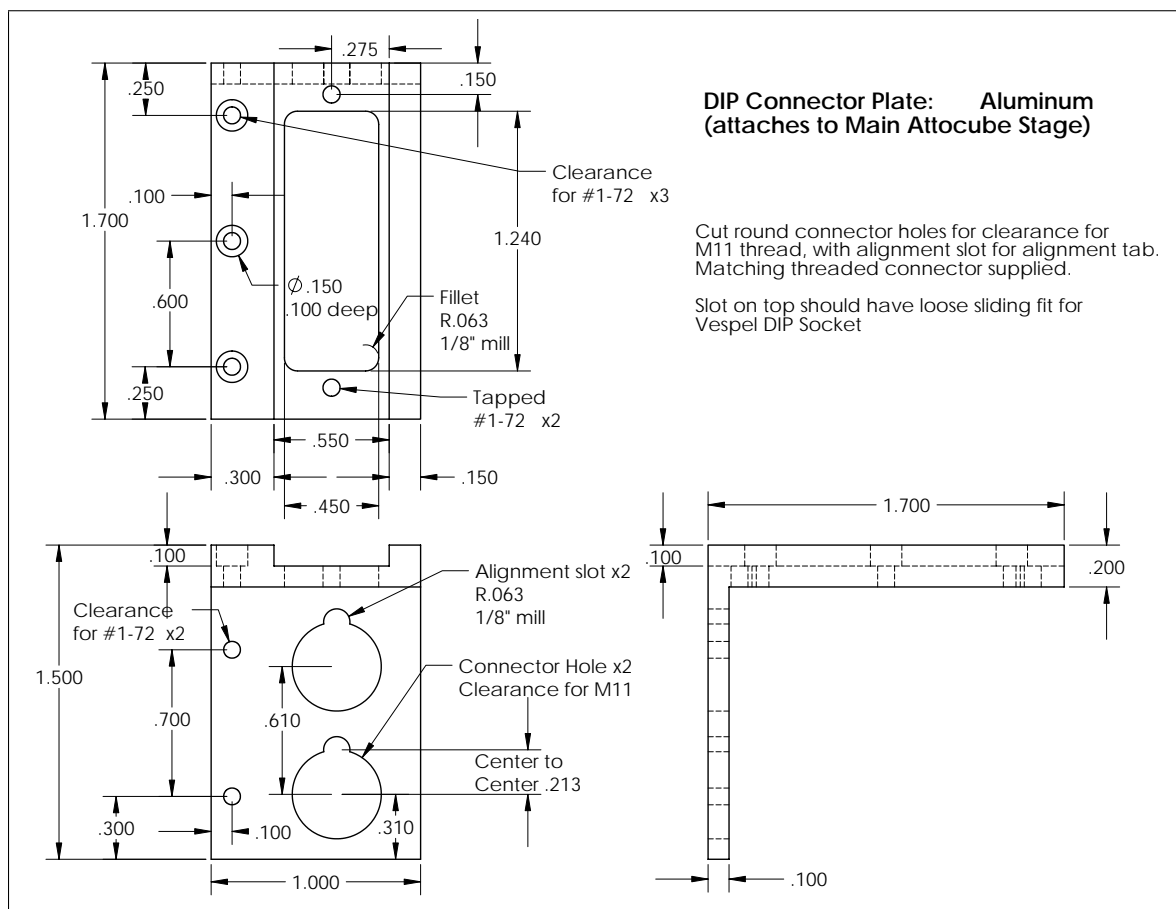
Schematic drawing of the DIP (Dual In-line Package) connector. Two 12-pin cylindrical HRS connectors are inserted into the large side slots. Wires are soldered from the connectors to the pins extended down from the Vespel DIP socket.
